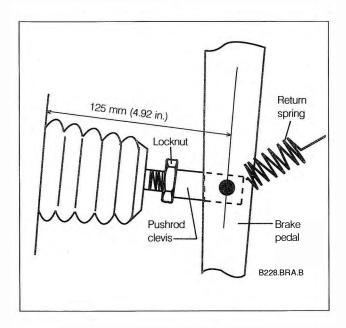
Basic brake pedal pushrod adjustment as viewed from side.
